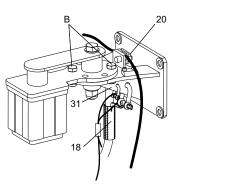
Top fixation bracket with lifting and safety wires and cable sock
